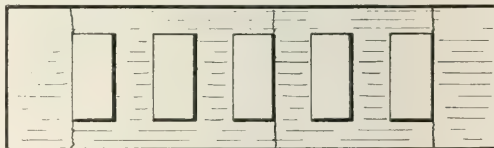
CRANK-END VALVE SEAT SHOWING THE POSITION OF THE THREE BREAKS
